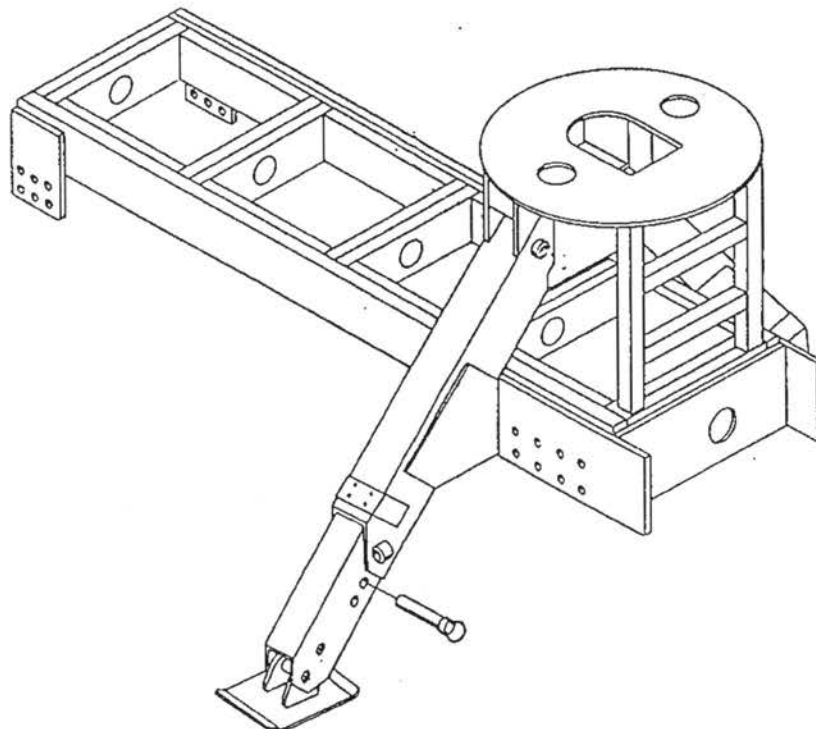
TORQUE BOX AND OUTRIGGERS
